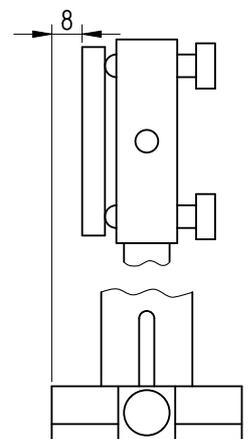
The distance between the edge of the mount and the mirror surface is 8 mm.
